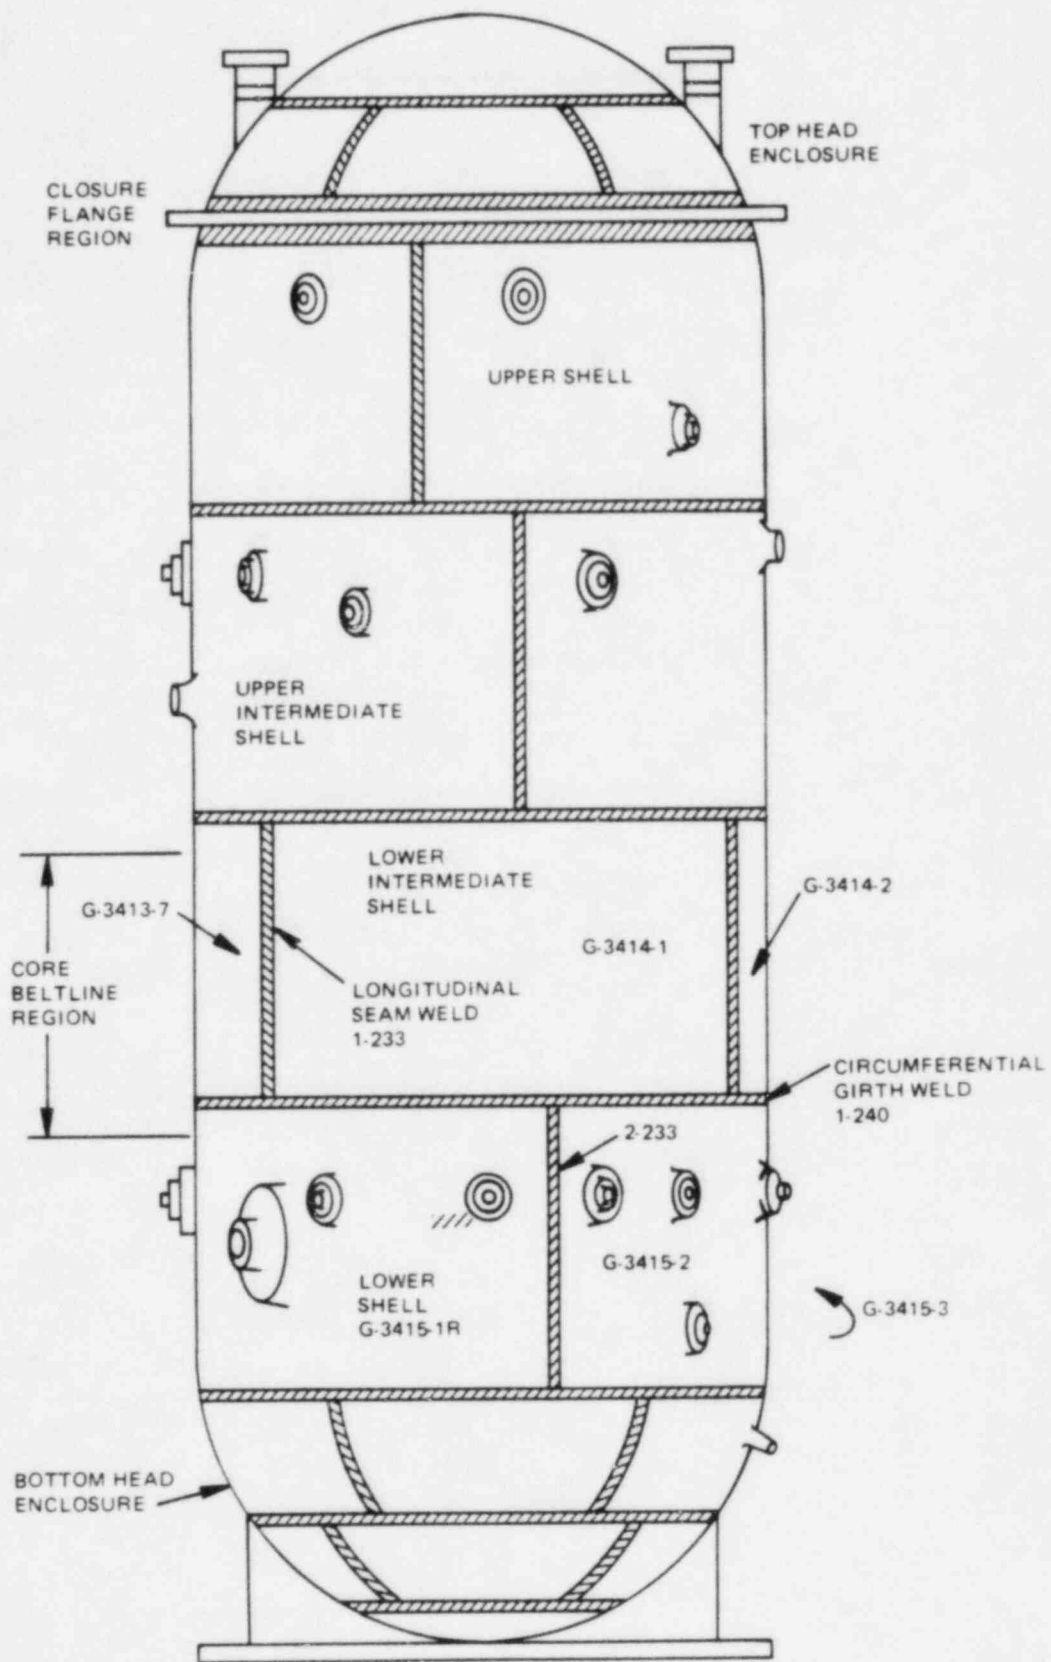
Schematic of the RPV Showing Arrangement of Vessel Plates and Welds
